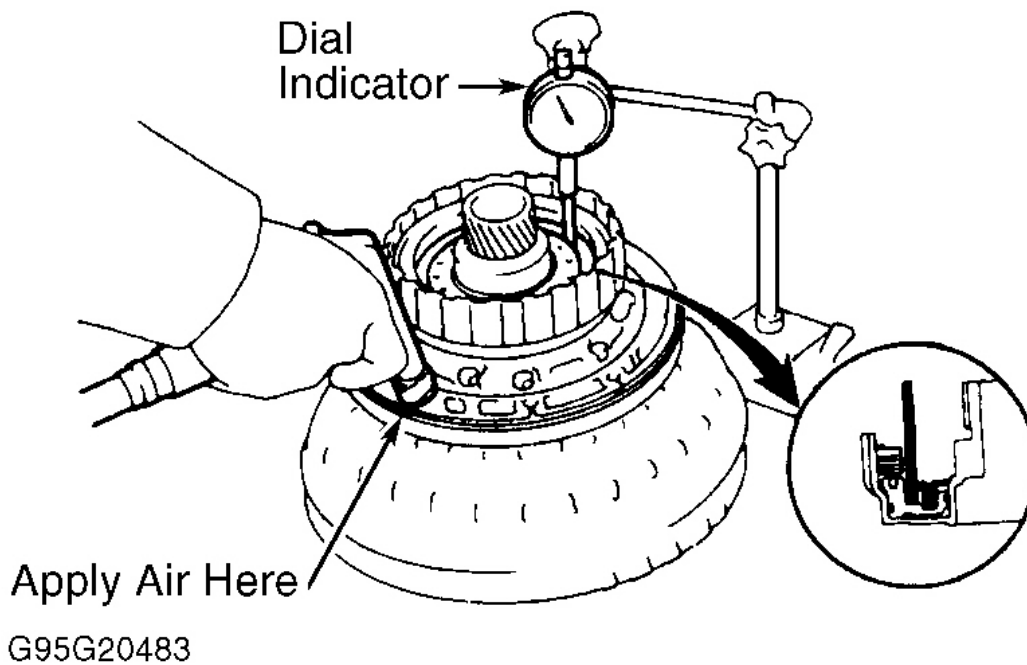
Removing OD Clutch Piston & Measuring Stroke
